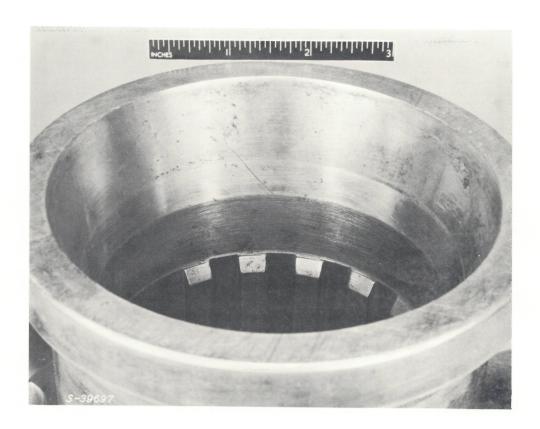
Corrosion Fatigue Failure of Special Shaft of AMS 6415 at Rockwell C-45-49.
